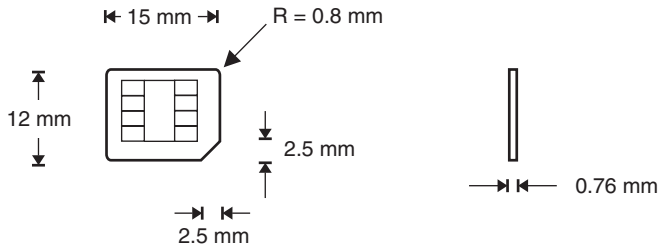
The mini-UICC format. Thickness: 0.76 ± 0.08 mm; corner radius: 0.8 ± 0.10 mm; diagonal corner 2.5 ± 0.8 mm. The indicated dimensions show the size of the card excluding tolerances
